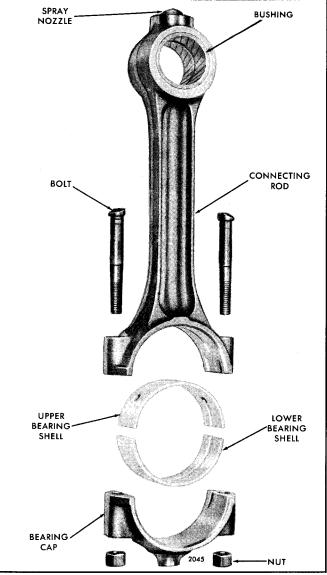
Connecting Rod Details and Relative Location of Parts
